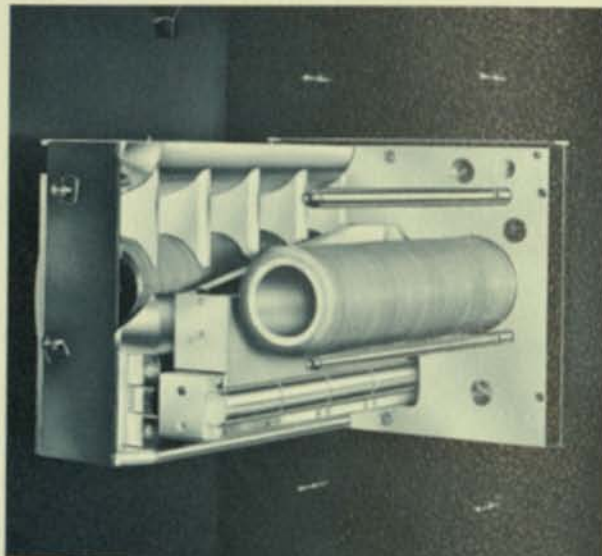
Multiple Drive Block Assembly with One Group of Drive Blocks Removed
